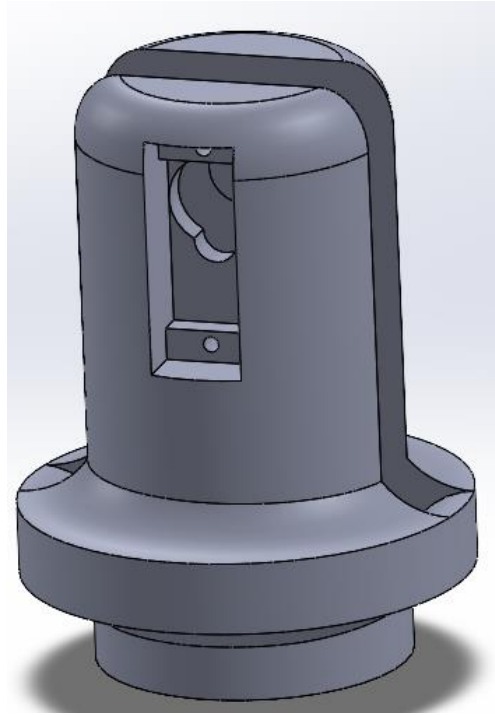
The Pincher Stabilizer for the Robotic Arm. This piece stabilizes the Claw Pincher onto the Claw Baseplate, ensuring that the Claw Pincher is consistently locked into place.
